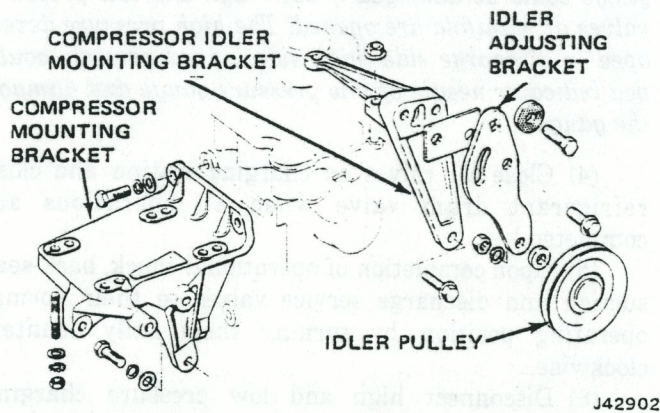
E-18 Compressor Mounting—49-State Six-Cylinder Engine
